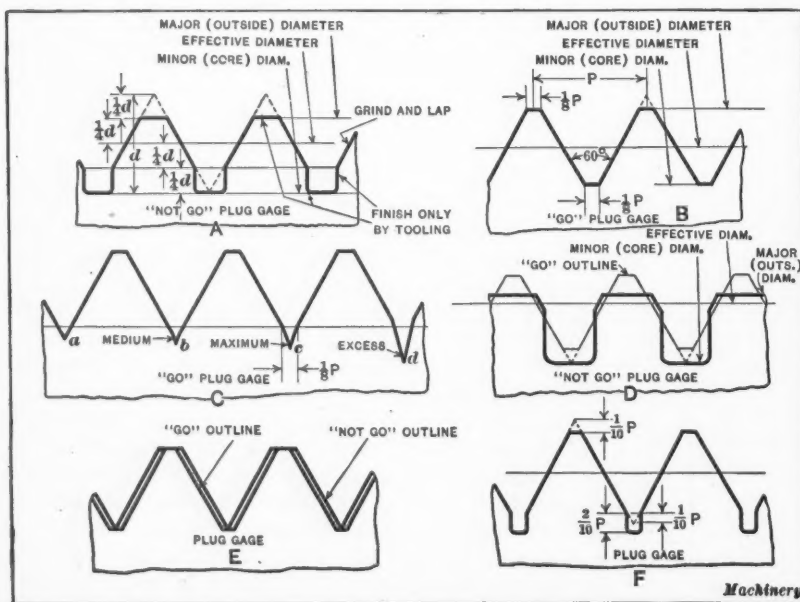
Diagram of Various Thread Forms for Thread Gages
